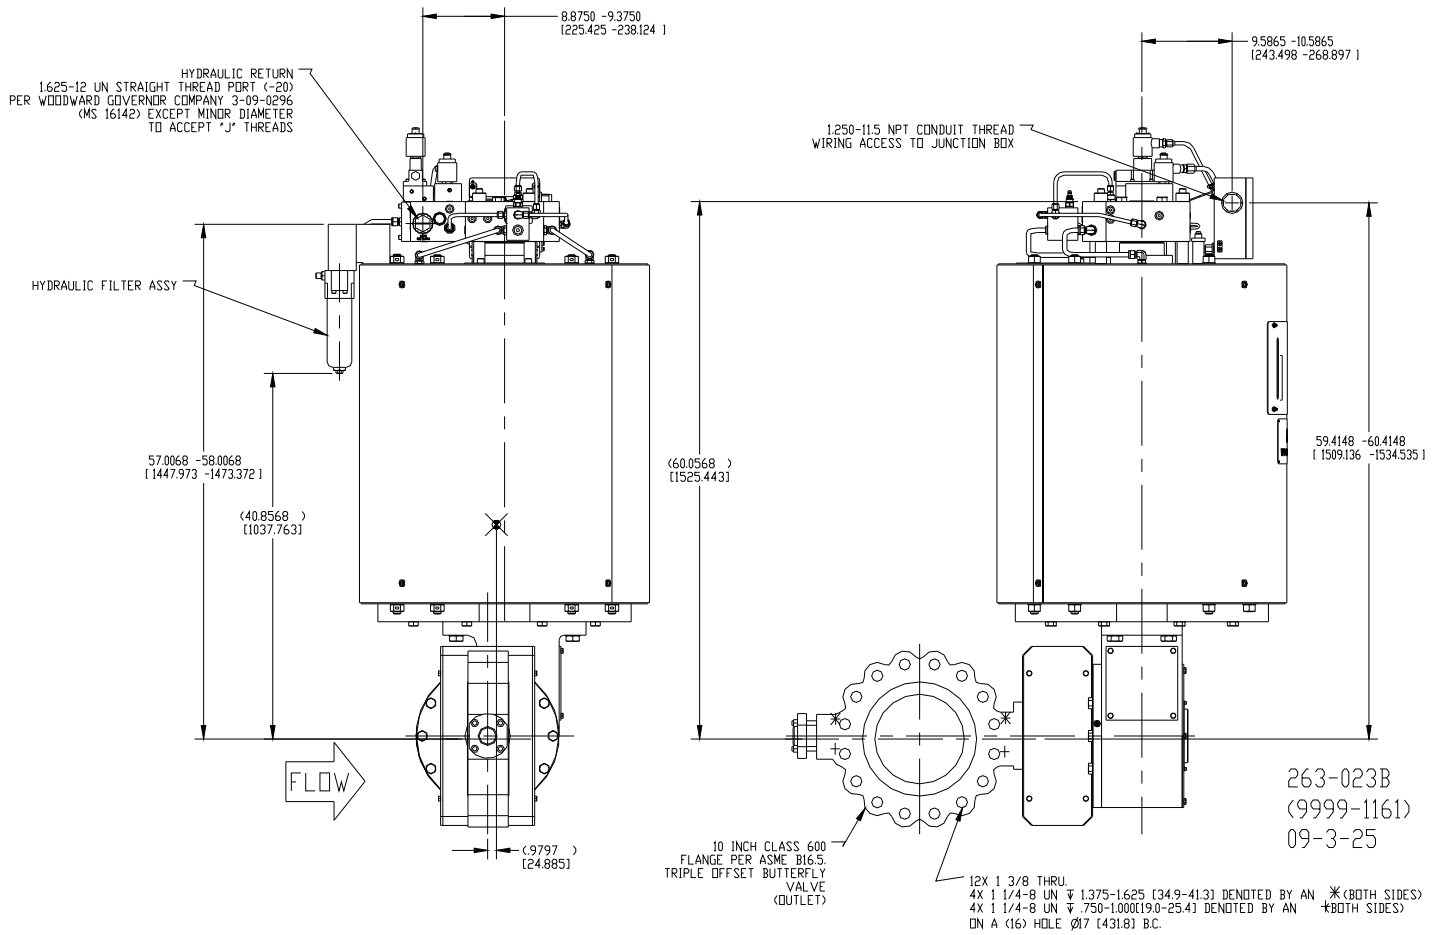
Outline Drawing, 10" valve (9904-916)
